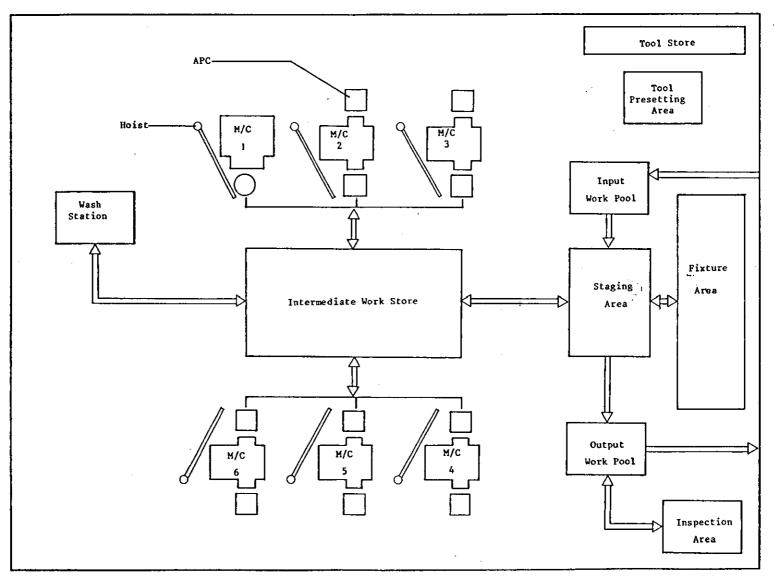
FMS C with CNC Machines, 4 Pallet APC
